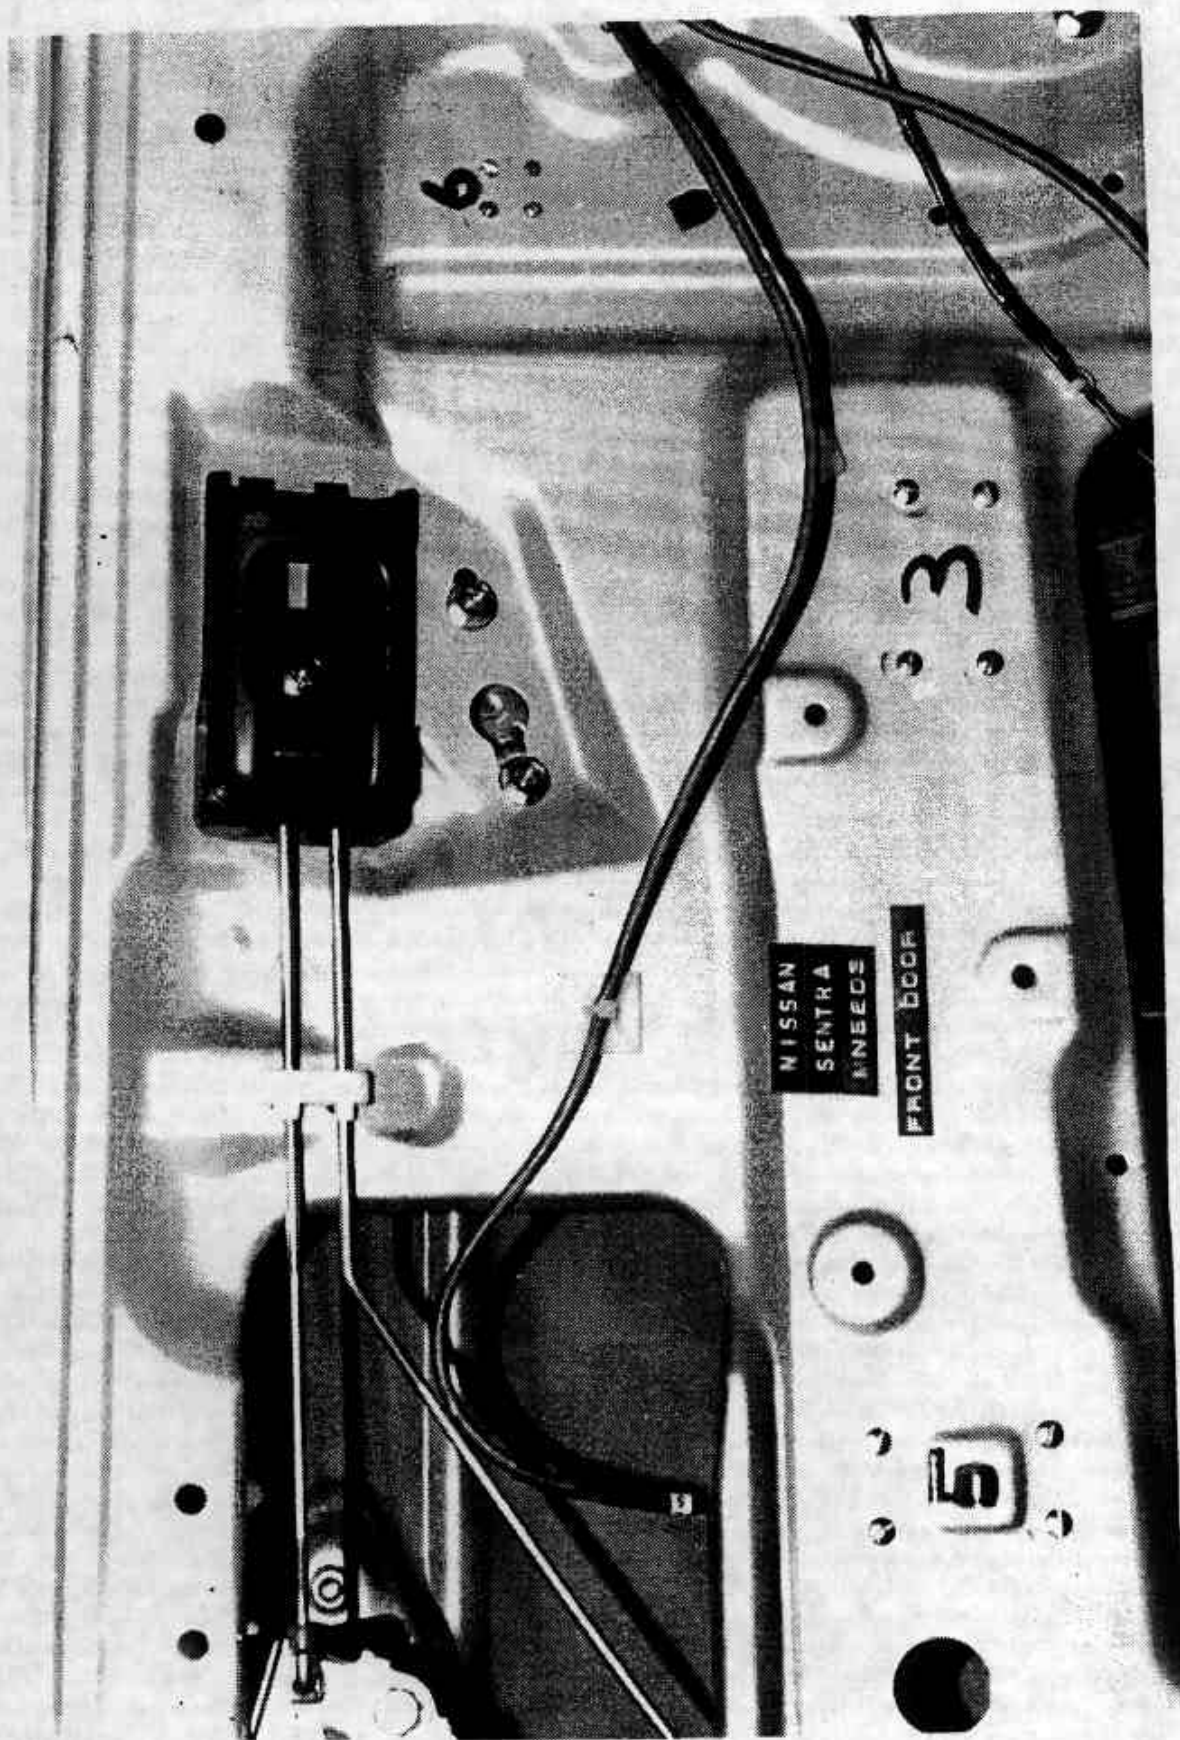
DRIVER DOOR ACCELEROMETER LOCATIONS
